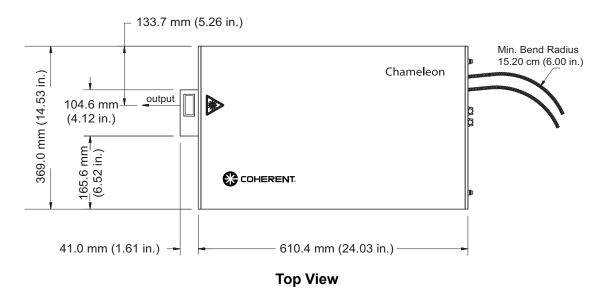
Chameleon Ultra Laser Component Dimensions
